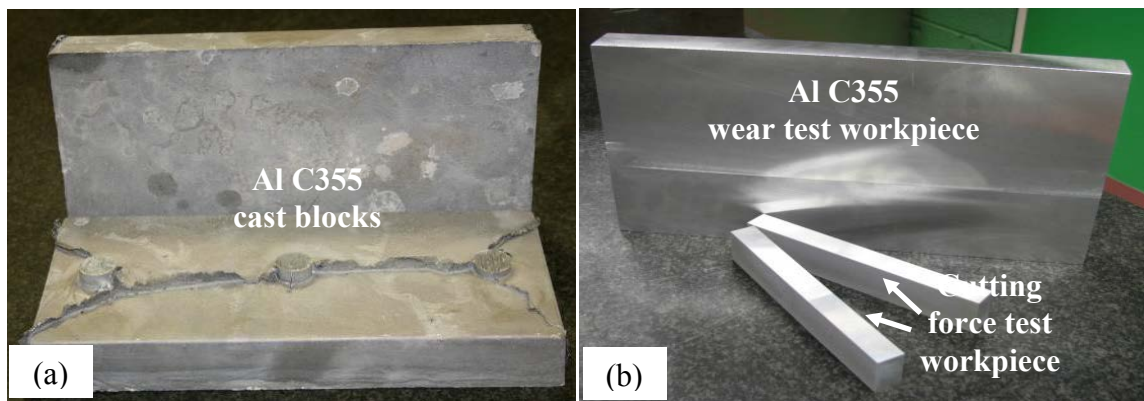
Al workpiece blocks in (a) cast and (b) cast/machined form for Phase 3A tests
